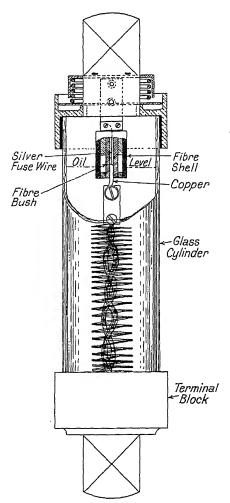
Silver Wire Fuse Breaking under Oil.
